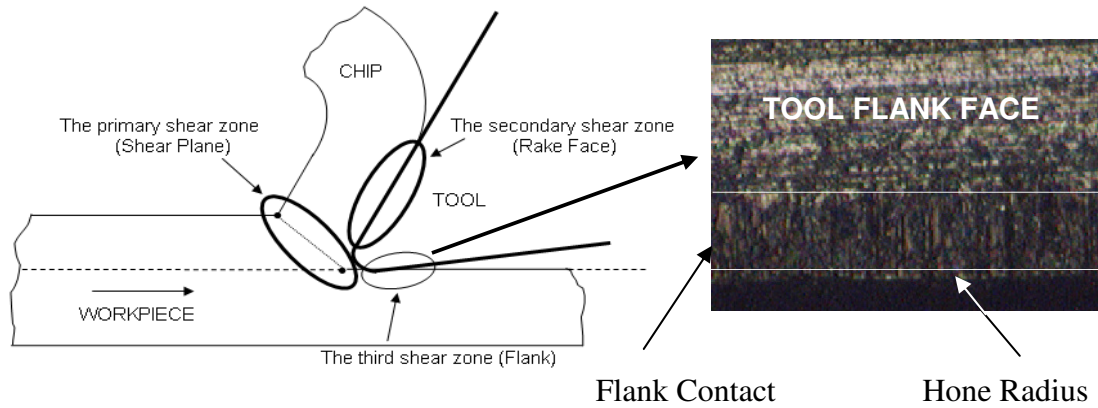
Orthogonal cutting geometry and flank contact visualization (top view of flank).
